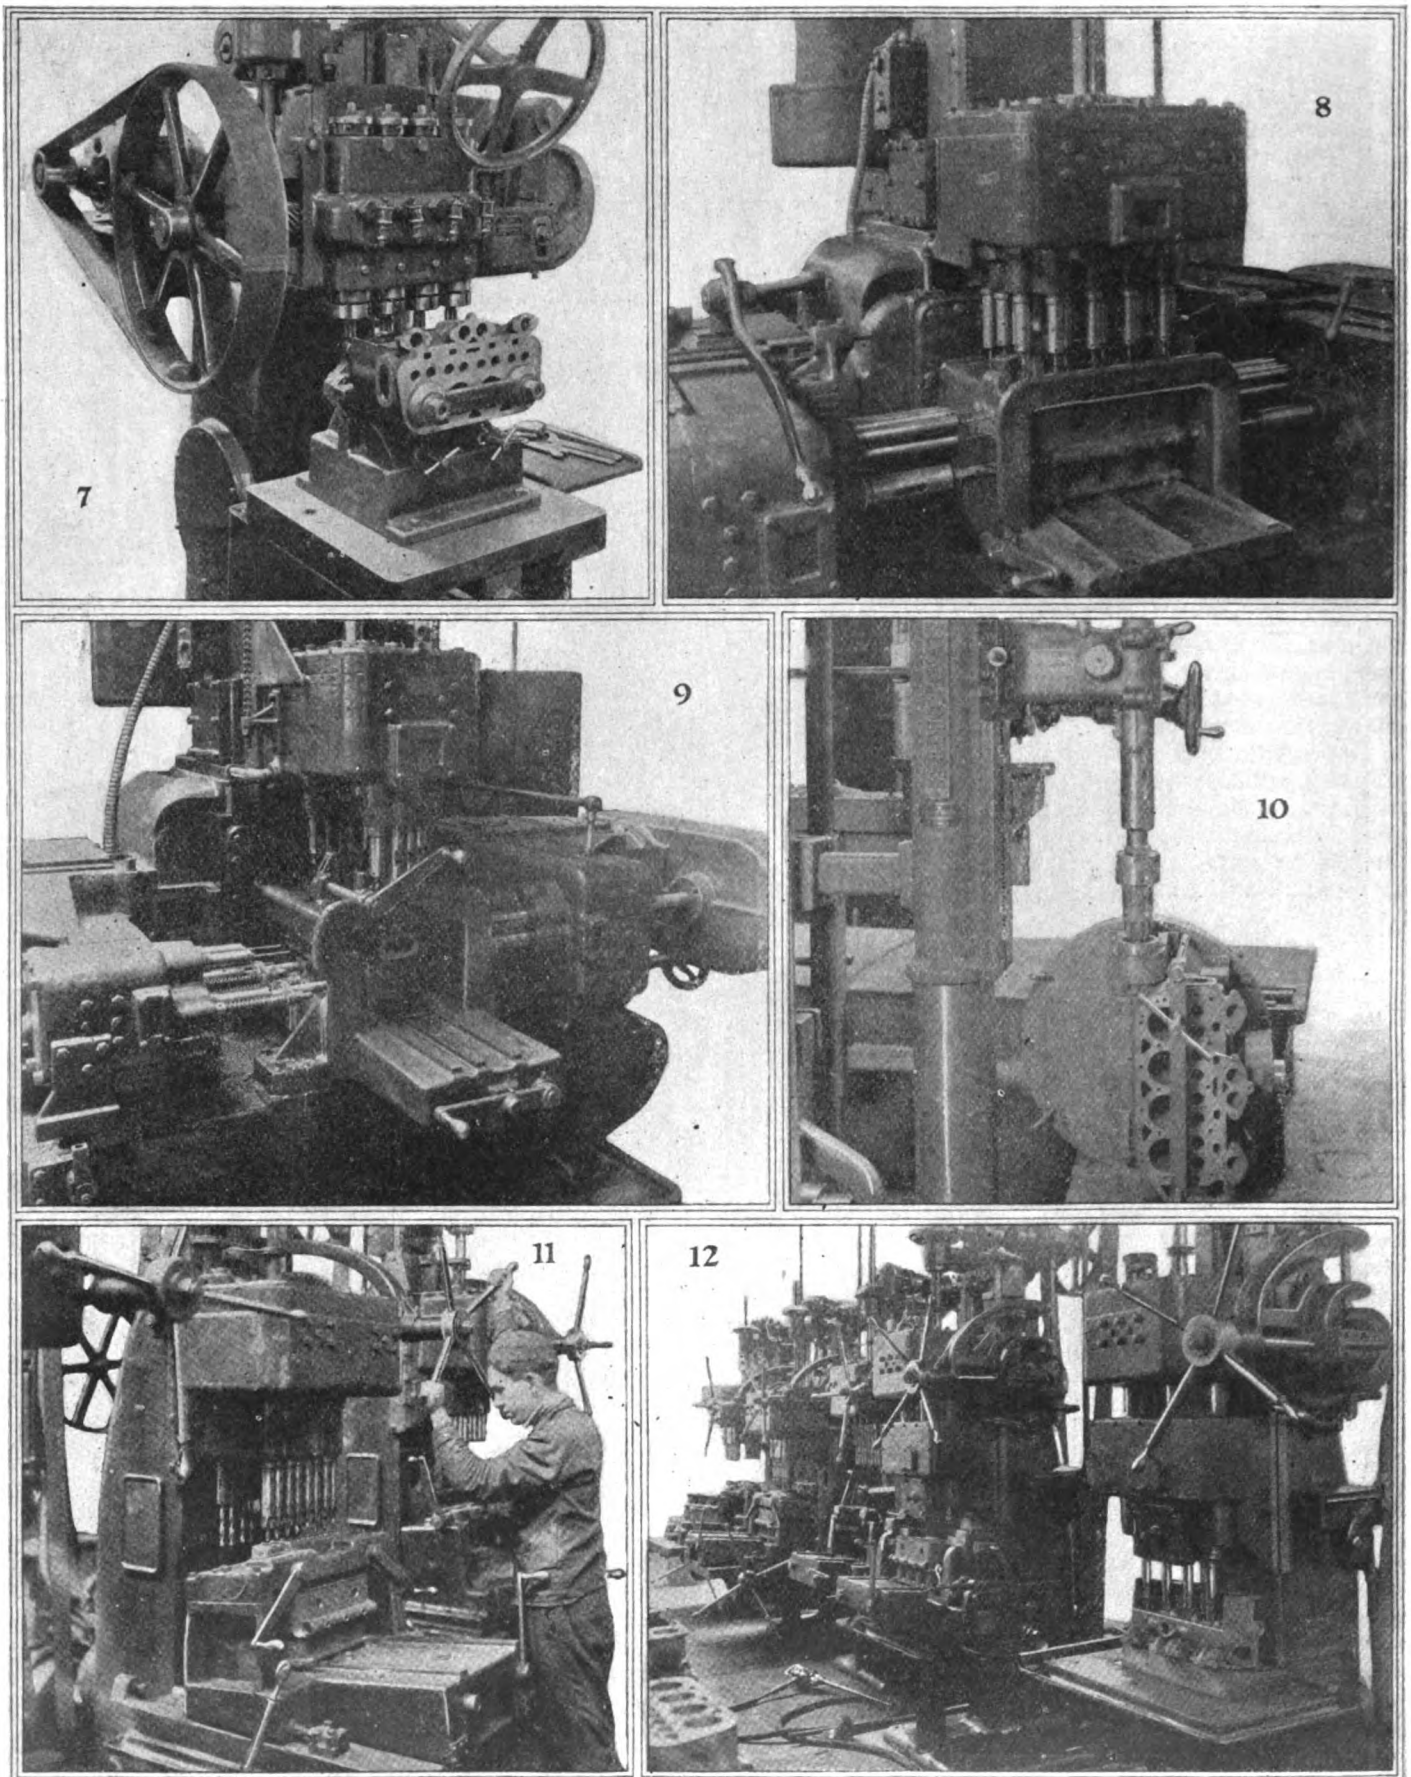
Profiling machine made by Automatic Machinery Co. for profiling valve in section cover surface. Fig. 8—Three-way Foote-Burt drill, drilling 35 holes simultaneously, taking care of all the bolt holes on the top and both ends of the cylinder block. Fig. 9—Three-way Foote-Burt drill, drilling on front and rear sides of block and on top. Fig. 10—Cincinnati 24-in. radial which chamfers the gas intake manifold passage, counterbores and faces water circulation hole. Fig. 11—One of the Foote-Burt machines which works on the valve stem guide holes. There are a battery of these, one operator taking care of five machines, handling 75 blocks an hr. Fig. 12—View of the battery of Foote-Burt drills which is handled by one operator working on the valve stem guide holes and the valve opening chambers
